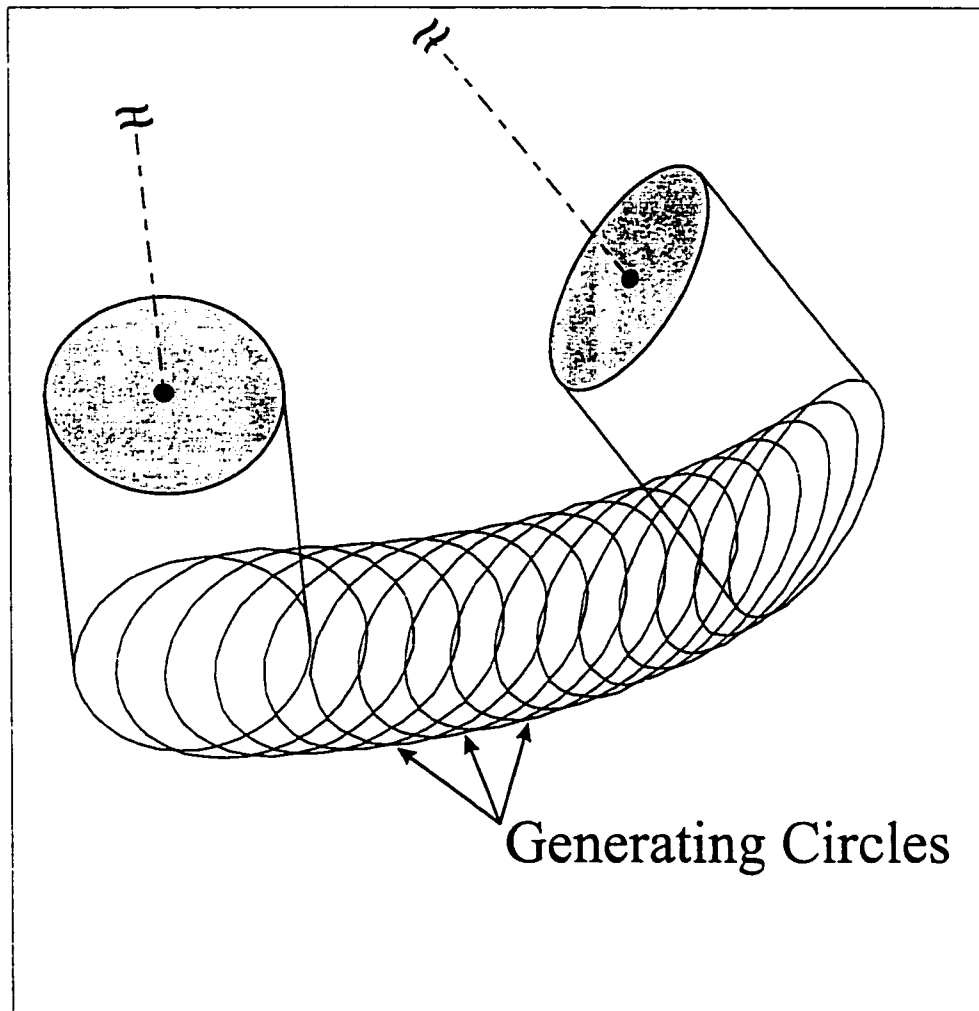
A Surface Generated by Rotating a Flat-End-Mill about a Point on the Tool Axis
